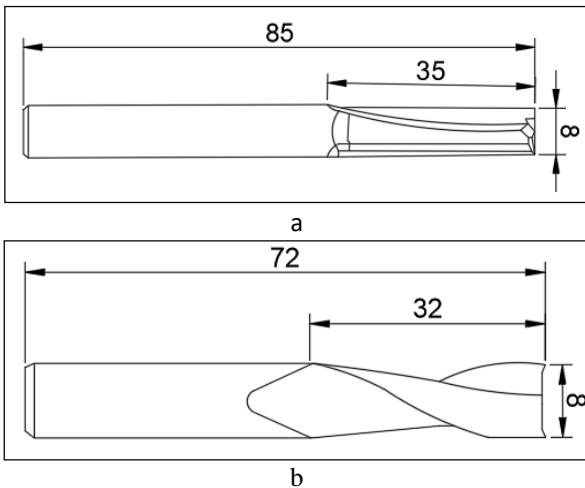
High-speed steel end mills (mm) a) Two-flutes straight end mill (Netmak), b) Two-flutes helisel end mill (Knob)
